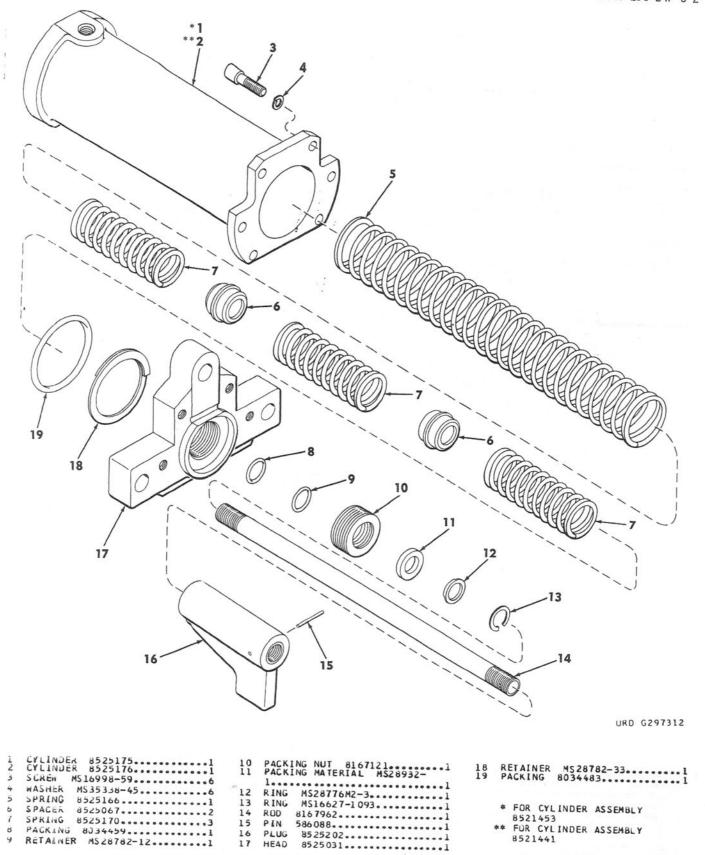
CYLINDER ASSEMBLY, ACTUATING, LINEAR /8521441 AND 8521453/
